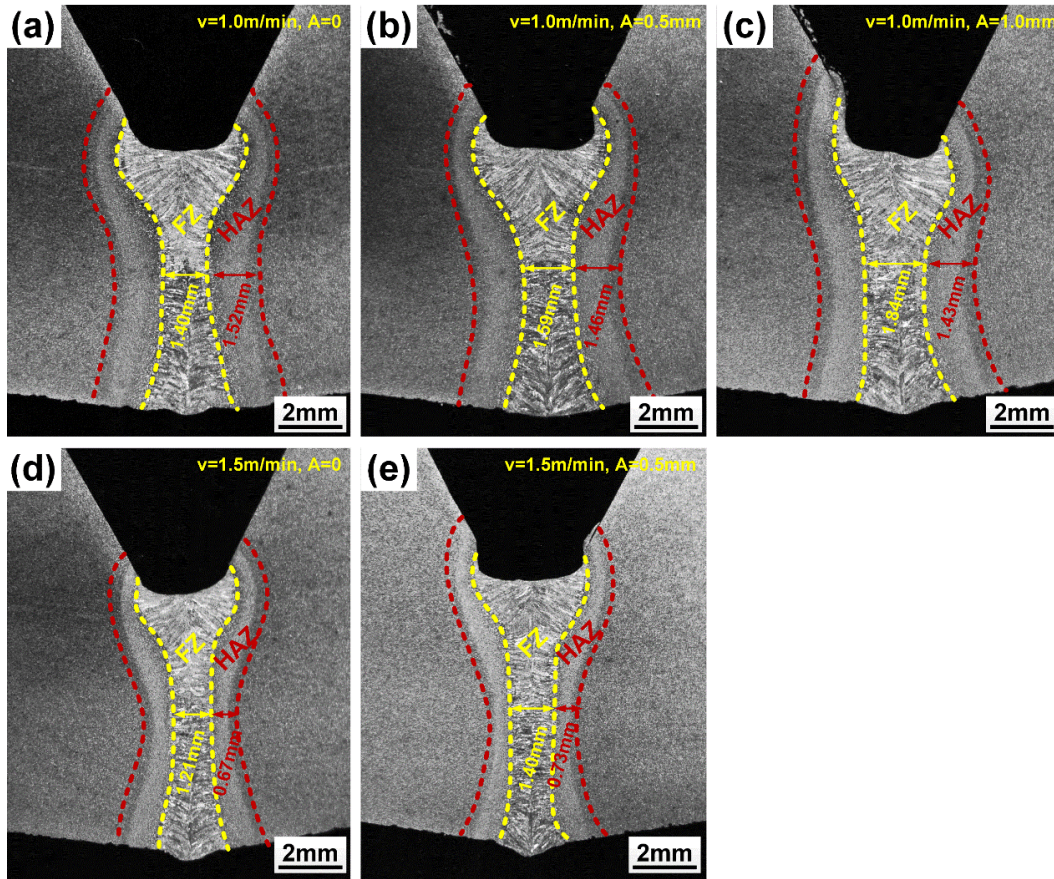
Cross-sectional morphologies: (a) static-spot laser weld,  $v = 1.0$  m/min; (b) wobble laser weld,  $v = 1.0$  m/min,  $A = 0.5$  mm; (c) wobble laser weld,  $v = 1.0$  m/min,  $A = 1.0$  mm; (d) static-spot laser weld,  $v = 1.5$  mm; (e) wobble laser weld,  $v = 1.5$  m/min,  $A = 0.5$  mm.
